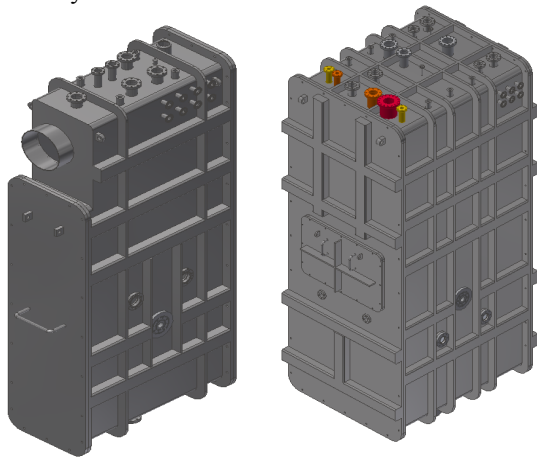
Vacuum vessel of QWR and HWR cryomodule.
